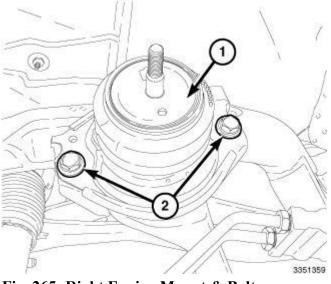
Right Engine Mount & Bolts Courtesy of CHRYSLER GROUP, LLC
